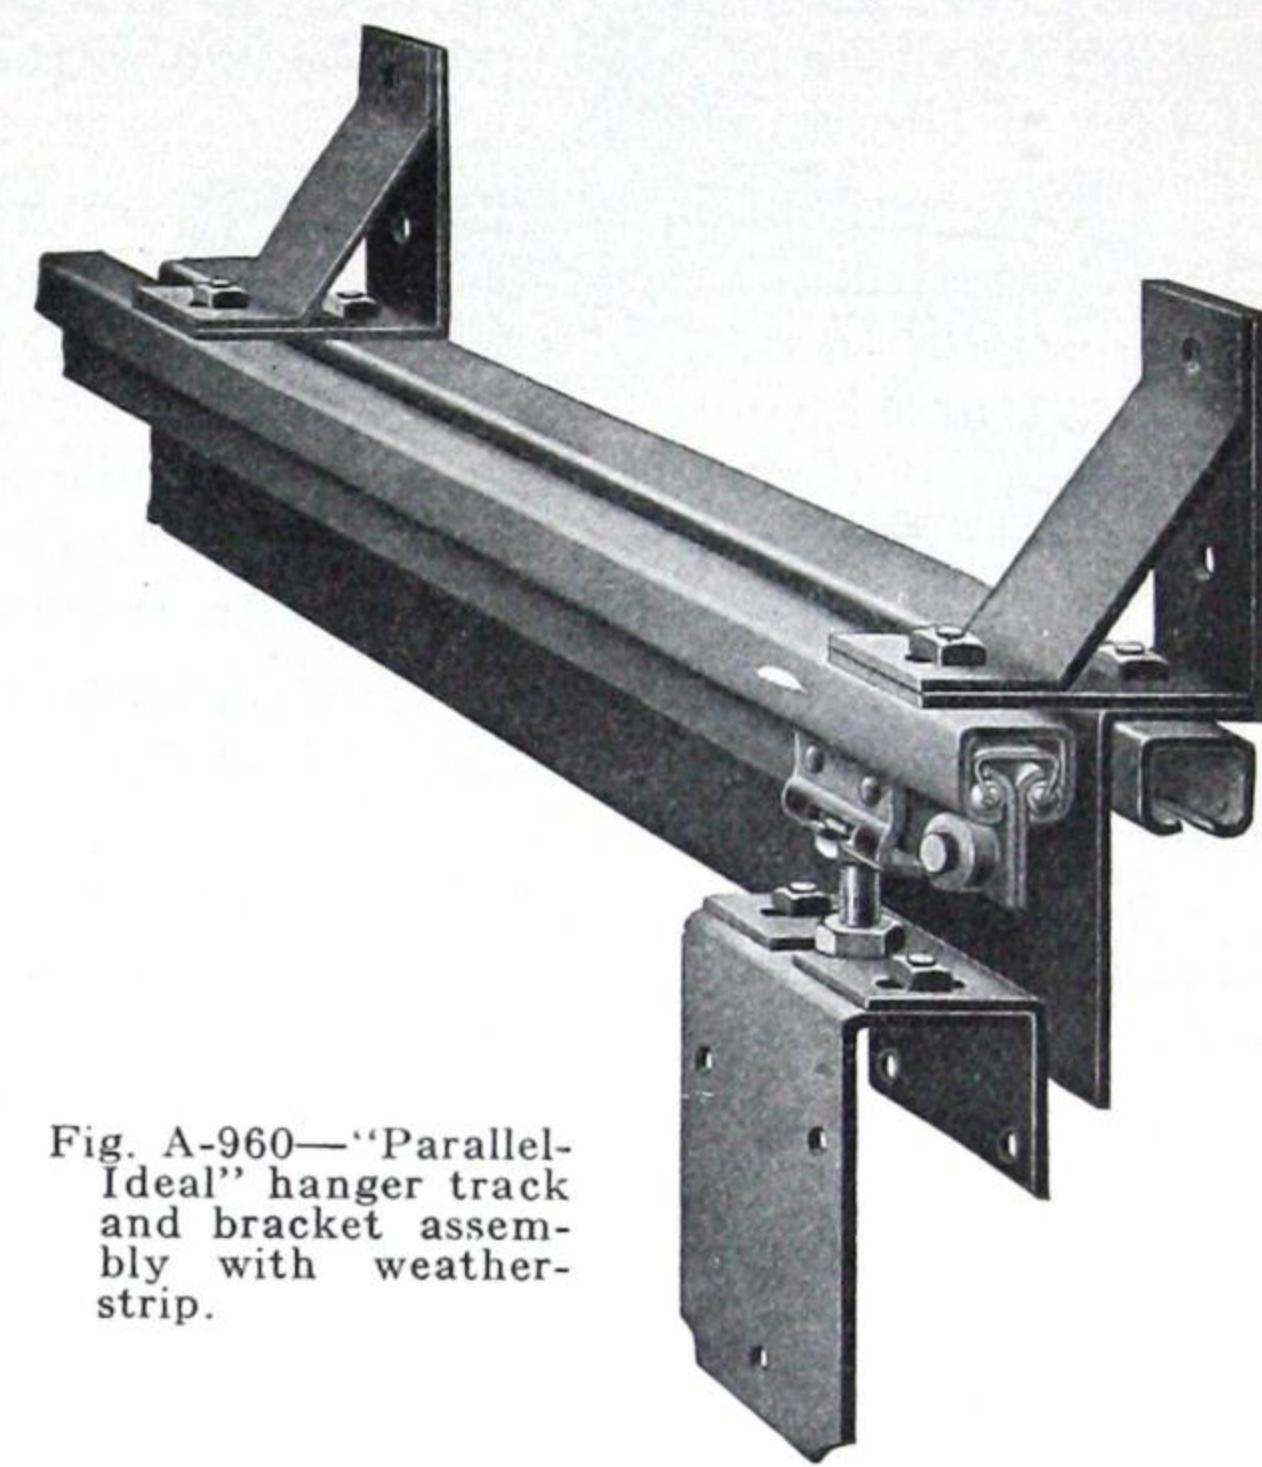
“Parallel-Ideal” hanger track and bracket assembly with weatherstrip.
